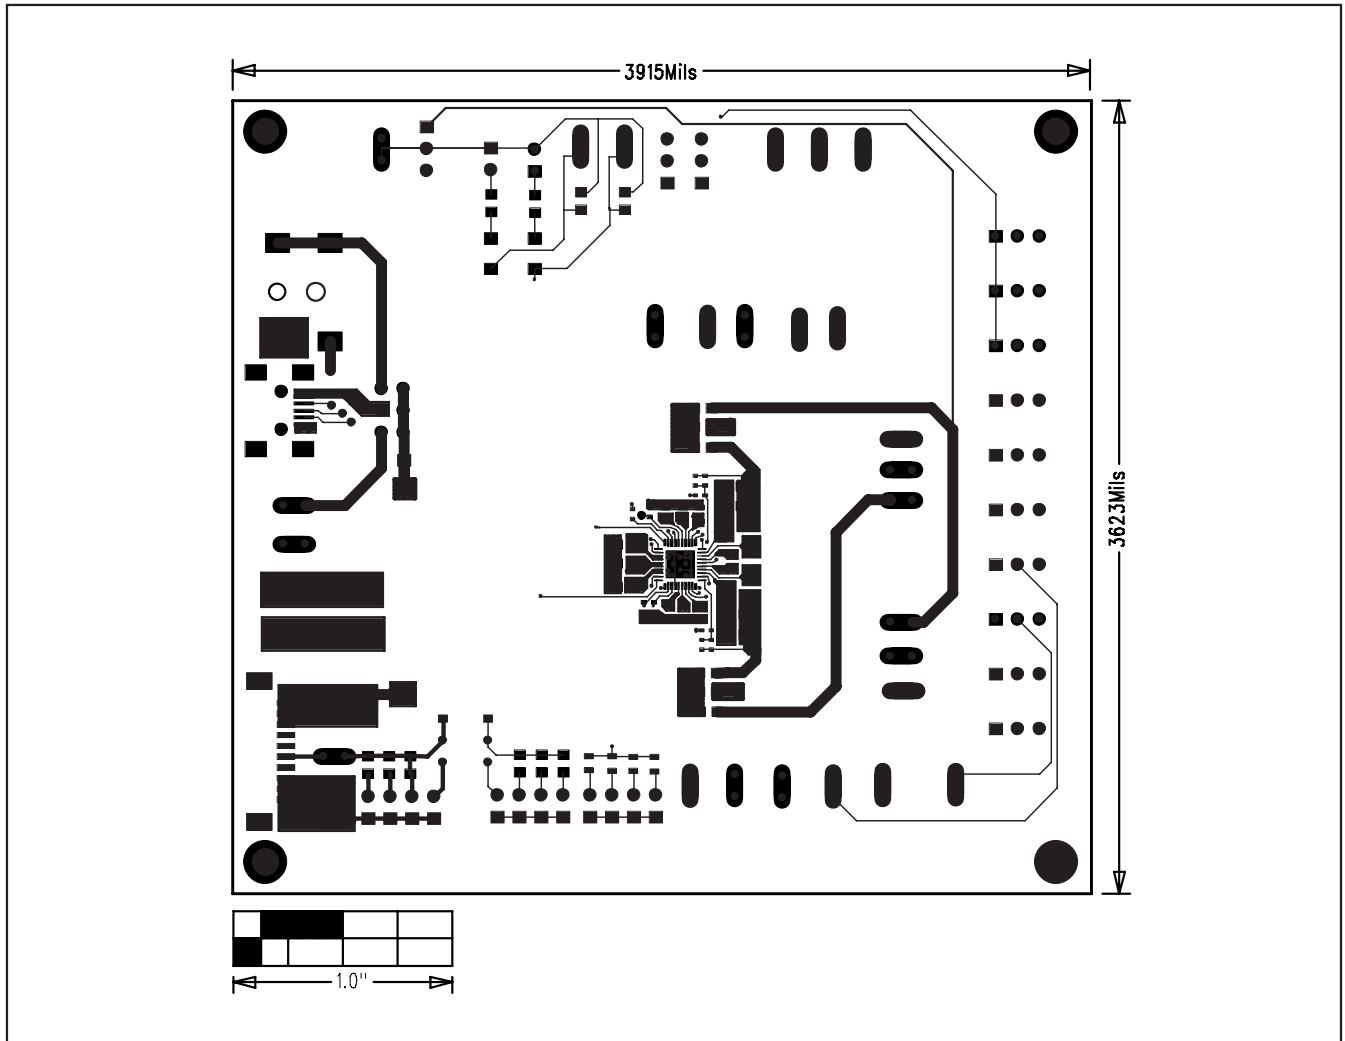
MAX8663 EV Kit PCB Layout—Top Layer 1
